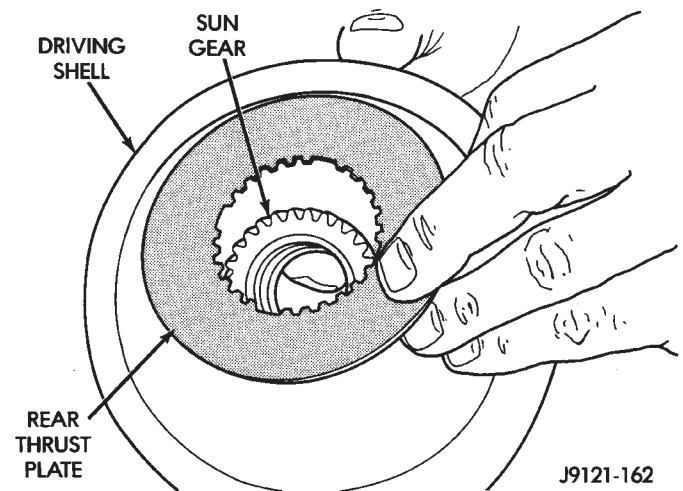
Installing Sun Gear And Rear Thrust Plate In Driving Shell
